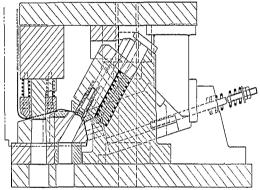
, Piercing and embossing backsplasher by cam-actuated punches (workpiece shown in Fig. 12-13).
